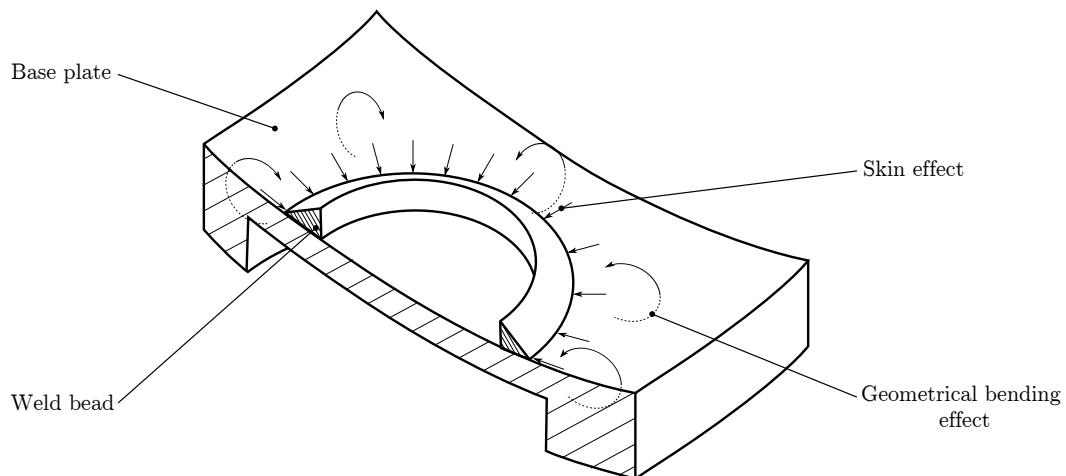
Cross-sectional view of the base plate and weld bead with outlined the bending and skin effects due to the incremental cutting process
